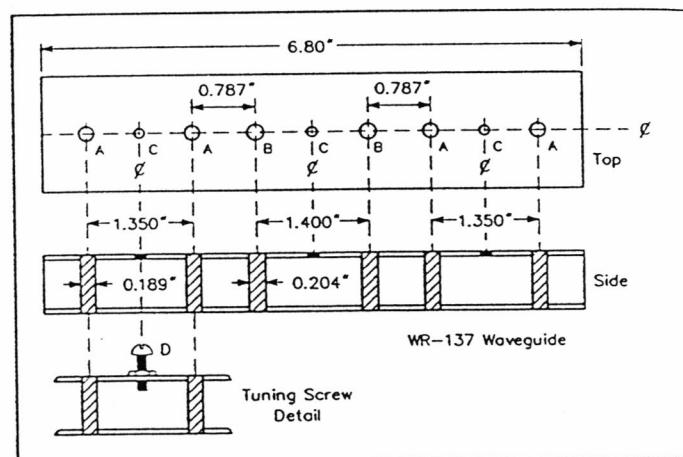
5.7-GHz Waveguide Bandpass Filter. Locations of holes and components are A: No. 11 drill for 0.189-in round brass rod; B: No. 6 drill for 0.204-in. round brass rod; C: No. 36 drill for 6-32 screw; D: 6-32 × 5/8-in. screw with 5/16-in. nut (3 required).
